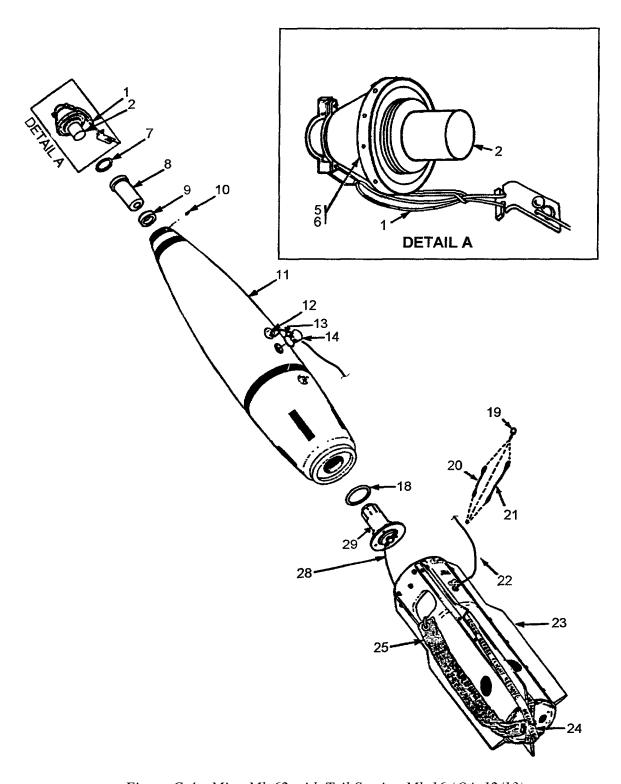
Mine Mk 62 with Tail Section Mk 16 (OA-12/13)
